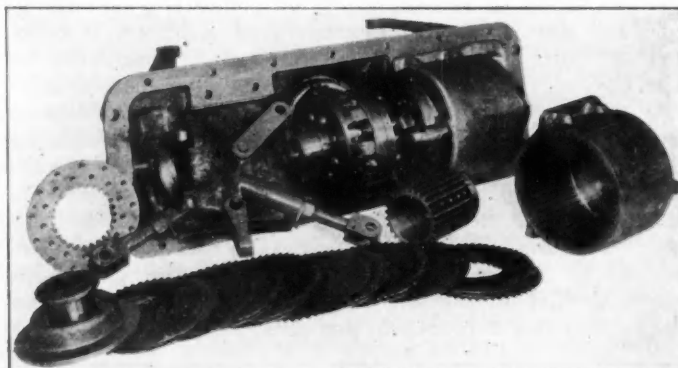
THE CONSTRUCTION OF THE BRAKE IS VERY SIMILAR TO THAT OF A MULTIPLE-DISC CLUTCH
